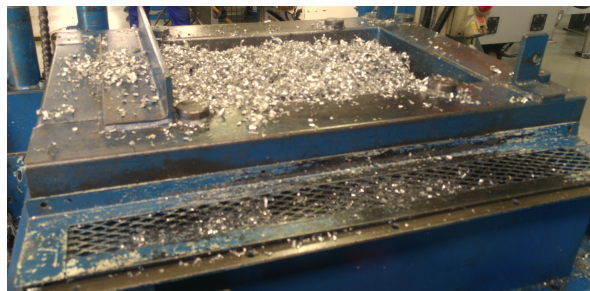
Loose Scrap Fed into Briquetting Machine
